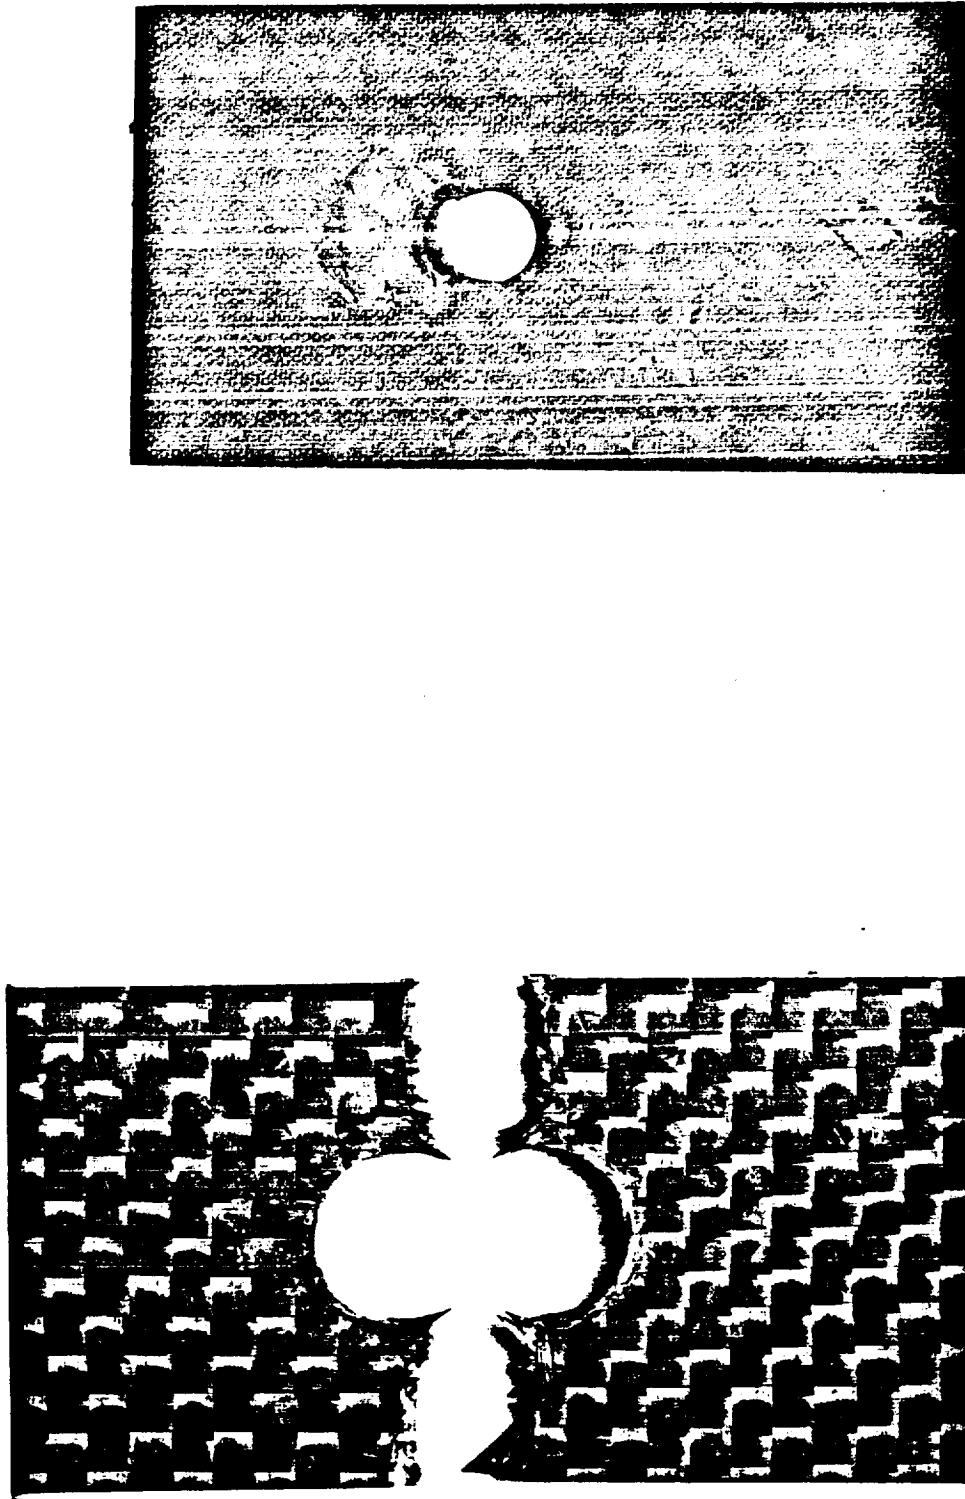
Photograph Of Bearing And Net Tension Failure Modes In Bolted Joint Specimens.
